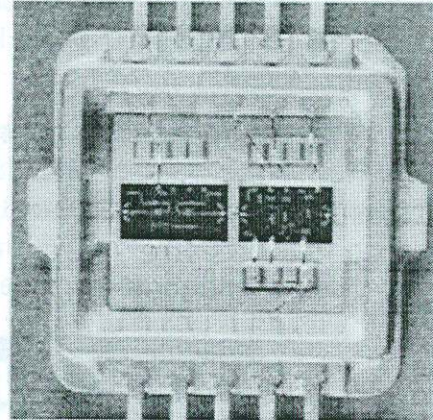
View of a micropackage (dimensions 12 x 11 x 3 mm)
